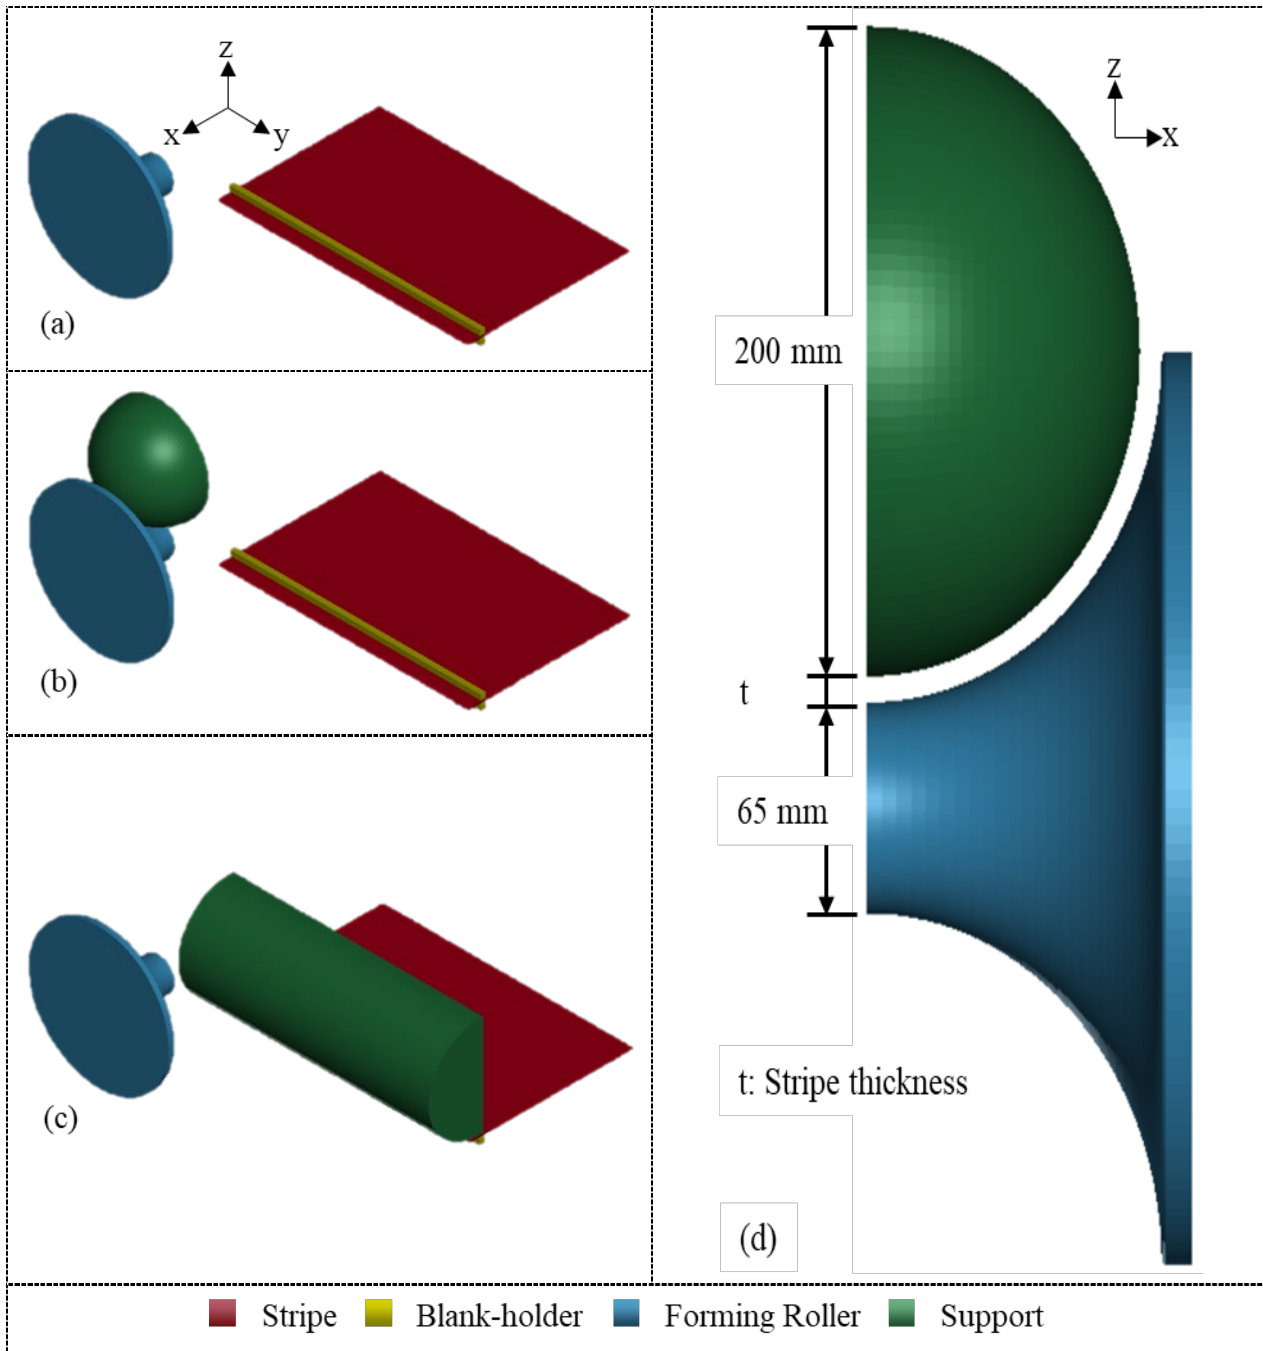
Schematic of the agile tube roll forming process for production of longitudinal welded tubes; (a) Support-less, (b) Static support, and (c) Dynamic support. (d) Dimensions and lateral view of the Forming roller and support.
